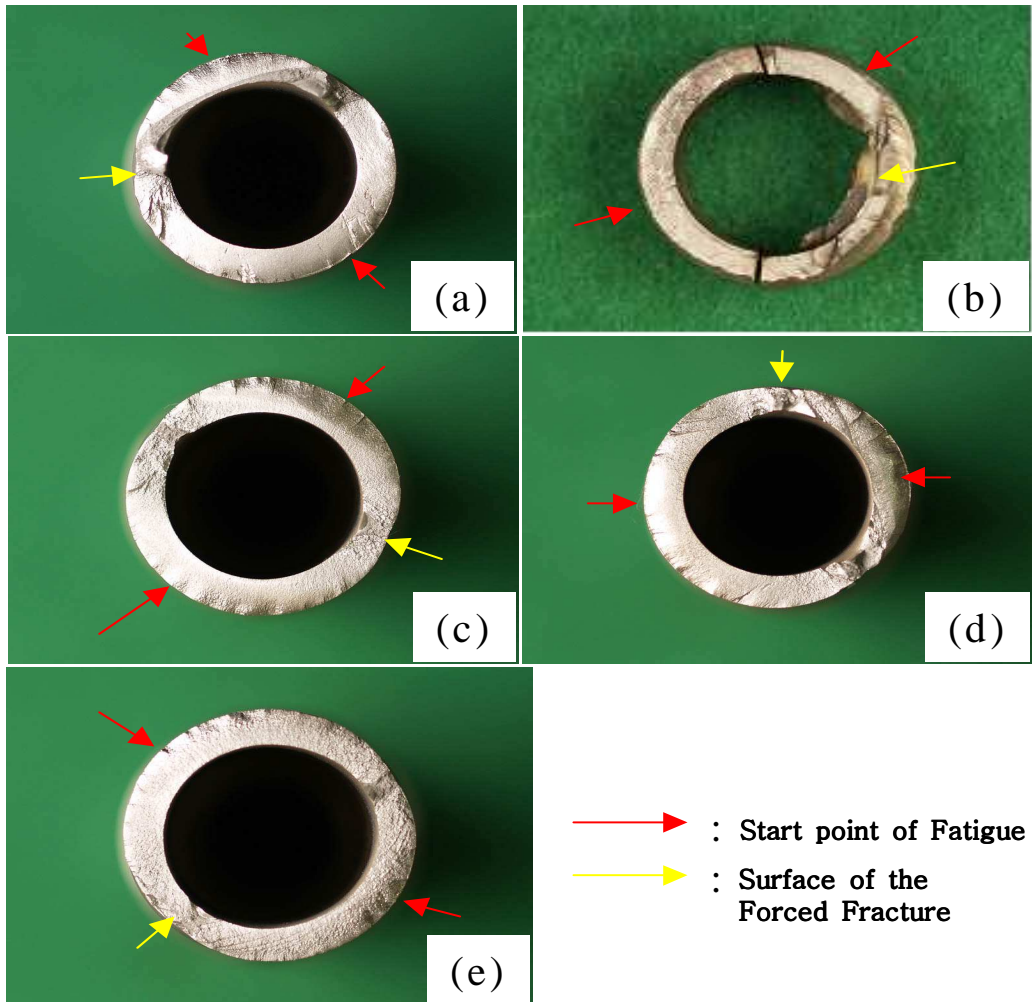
Fractographs of specimen fractured under fatigue stress amplitude of (a) 500Kg (b) 600Kg (c) 800Kg (d) 1000Kg (e) 1200Kg
